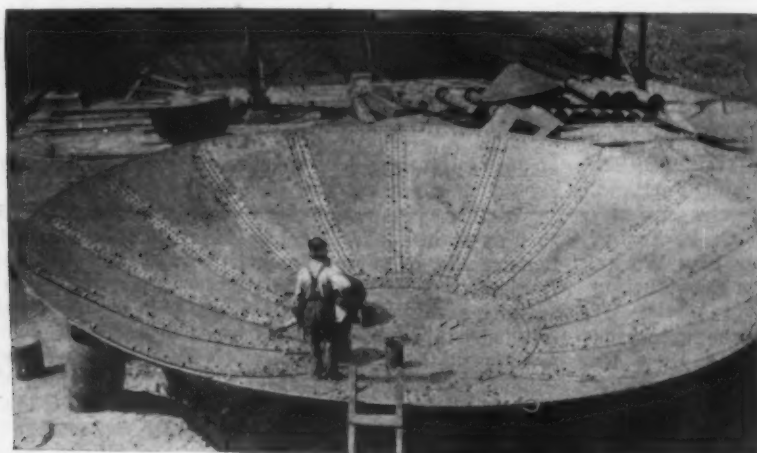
With a Diameter of Approximately 11 Ft., the Dished Head at Bottom of the Tank Receives the Ends of Sixteen Accurately Curved Shell Plates Forming the Lower Course or Ring. All are butt-strapped with double riveting. The top of the tank is built this same way
